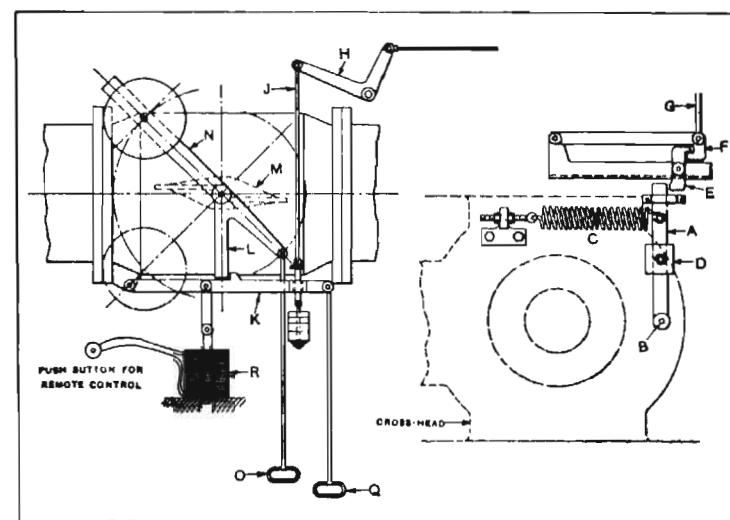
Automatic Speed-limiting Mechanism for Steam Engines
